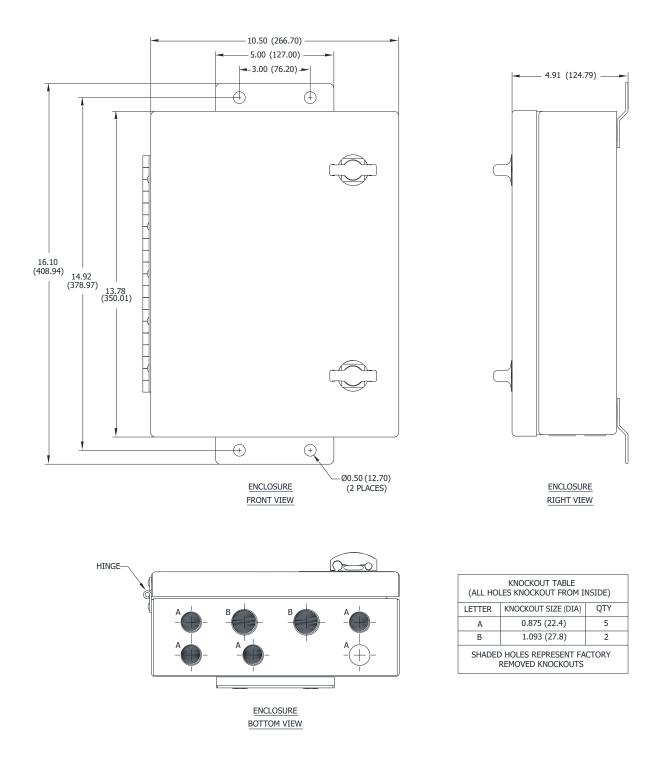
Controller FTS 371 SMART Aluminum Enclosure Mounting and Outline
